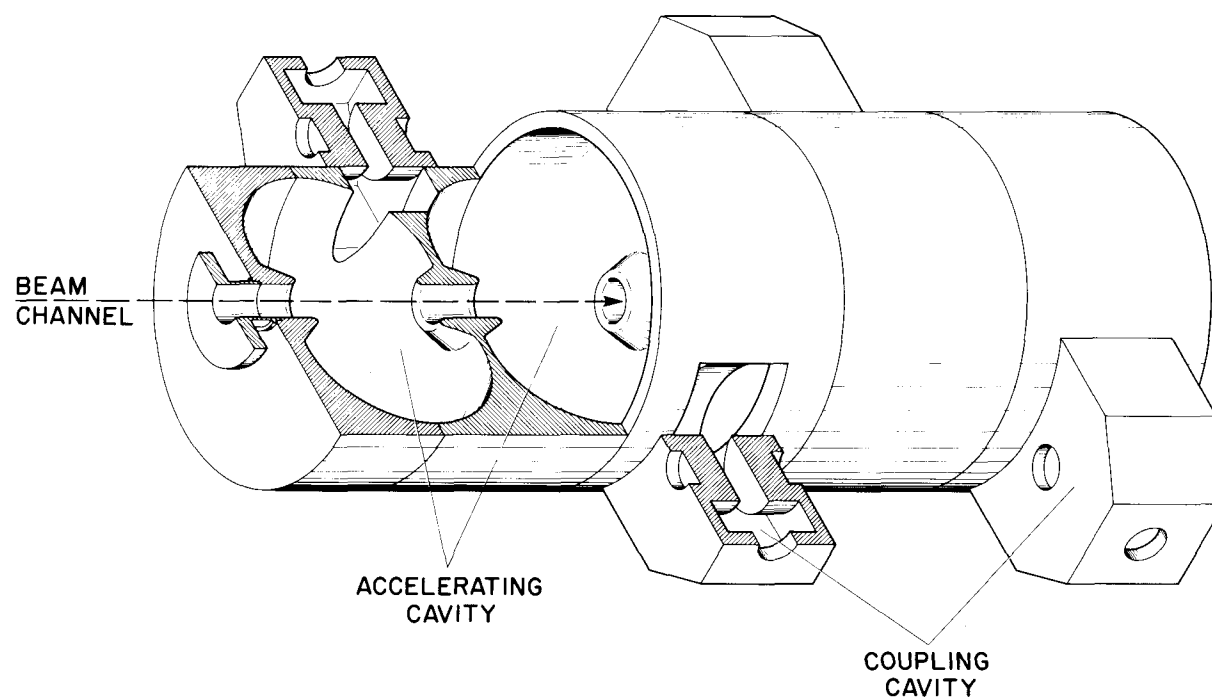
Cutaway drawing of a side-coupled optimized shunt impedance cavity chain.
